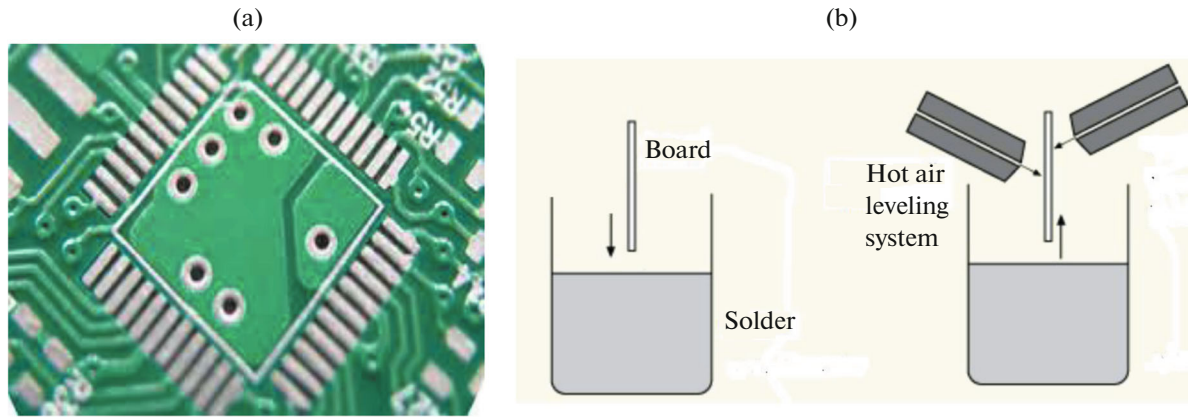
(a) Appearance of the board after solder leveling and (b) HASL scheme.
